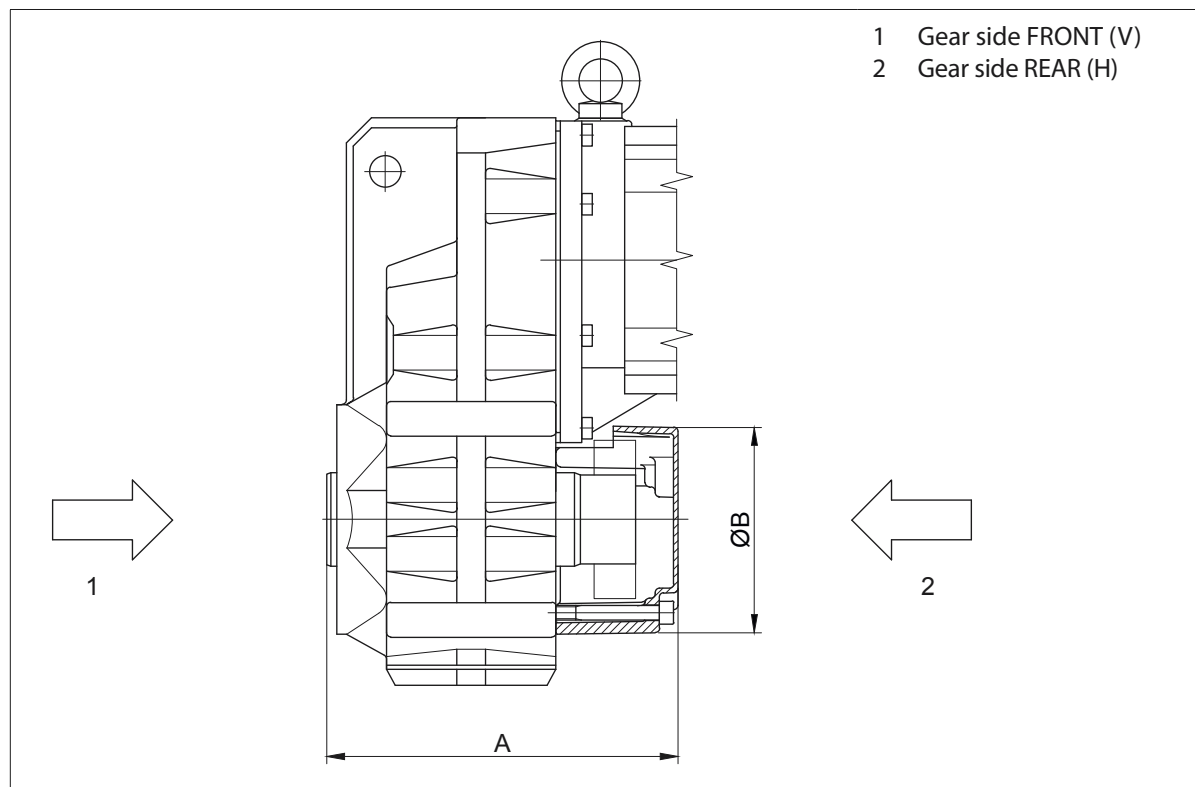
SSV cover for shaft-mounted gearbox BF10 ... BF90
